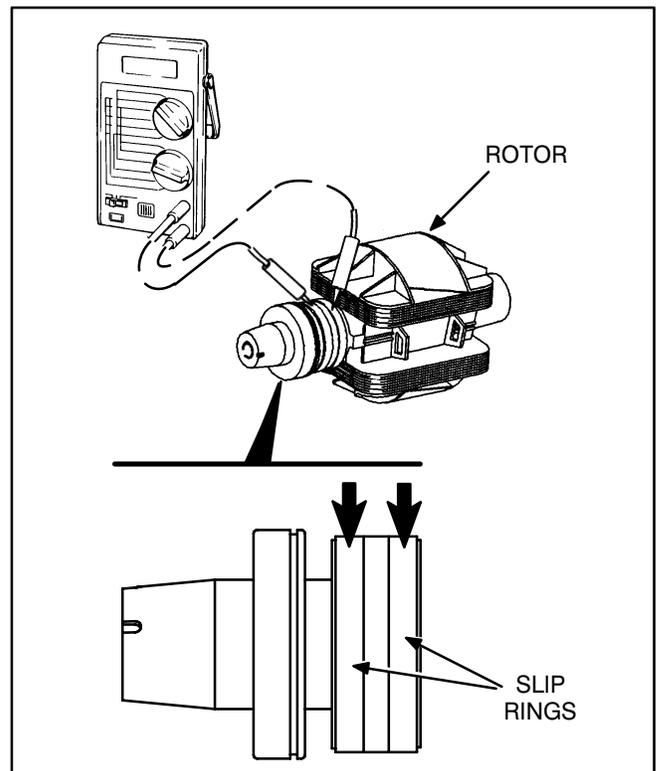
OPEN OR SHORTED ROTOR TEST
